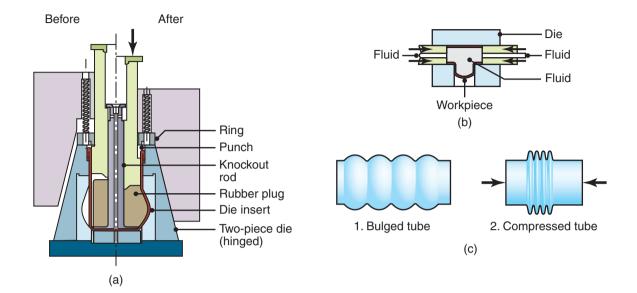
(a) The bulging of a tubular part with a flexible plug. Water pitchers can be made by this method. (b) Production of fittings for plumbing by expanding tubular blanks under internal pressure. The bottom of the piece is then punched out to produce a T. (c) Steps in manufacturing bellows.
